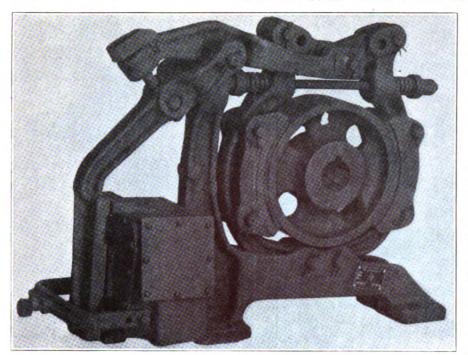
MARINE TYPE BRAKE FOR CARGO WINCH MOTOR
